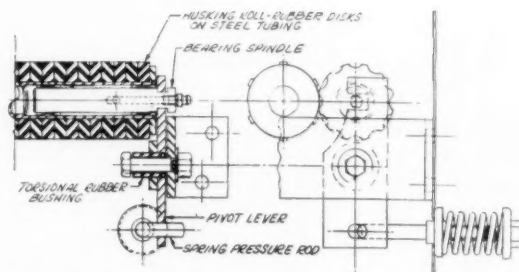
Cross section of husking-roll bearing and spring-pressure arrangement
